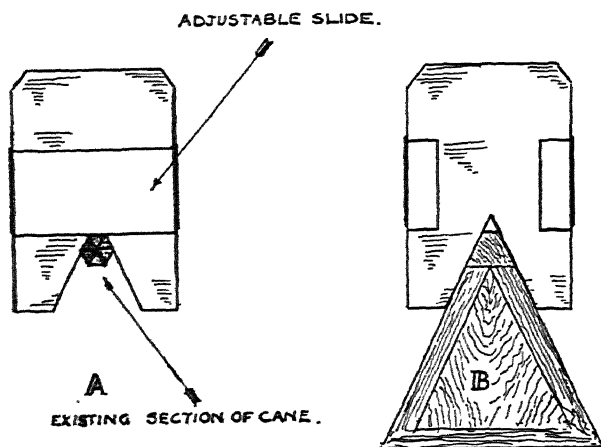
Front and rear views of gauge for checking width of flat on former against existing cane
